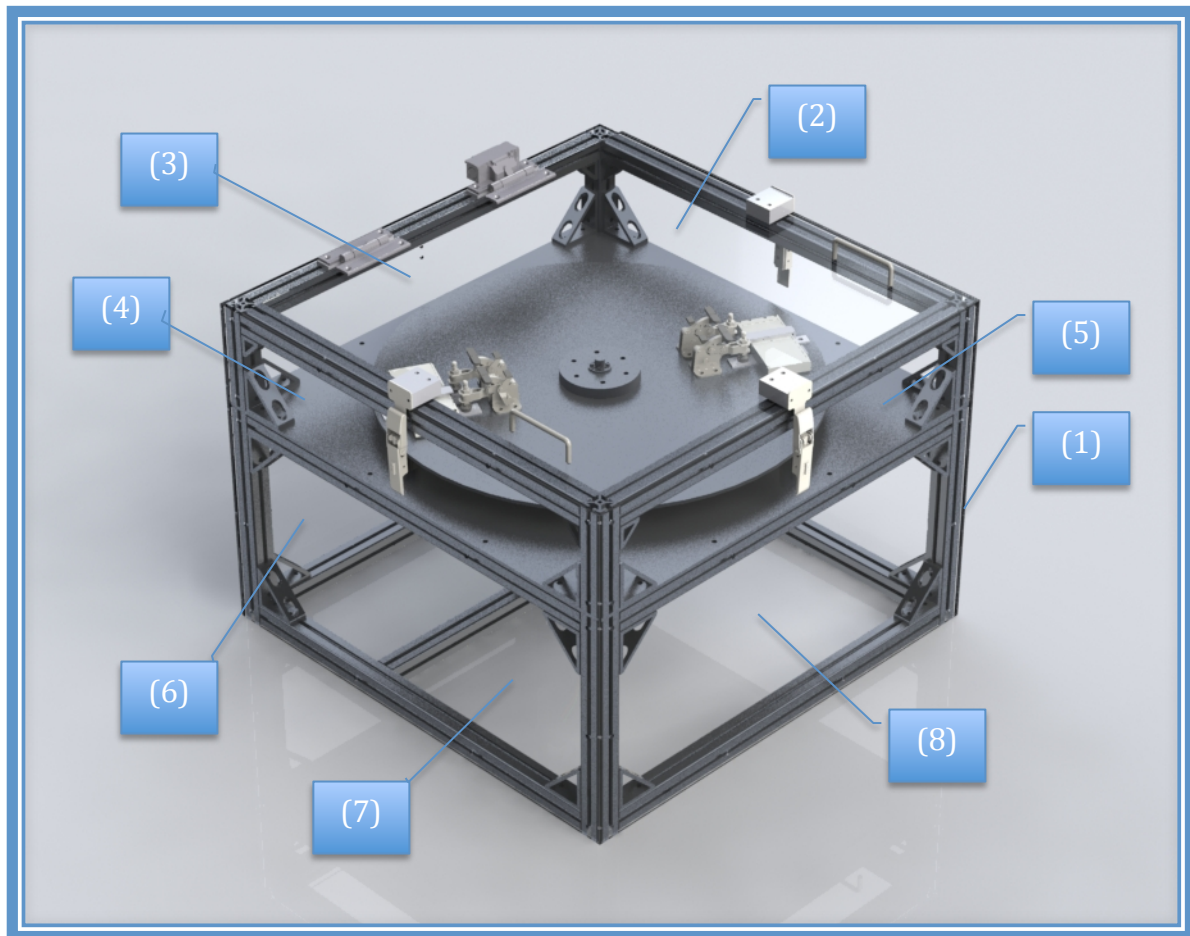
Full Assembly including (1) Frame Assembly, (2) Lid Assembly, (3) Drive Assembly, (4) Side Housing-Top, (5) Front Housing-Top, (6) Expanded Steel Housing, (7) Side Housing-Bottom, (8) Front Housing-Bottom
